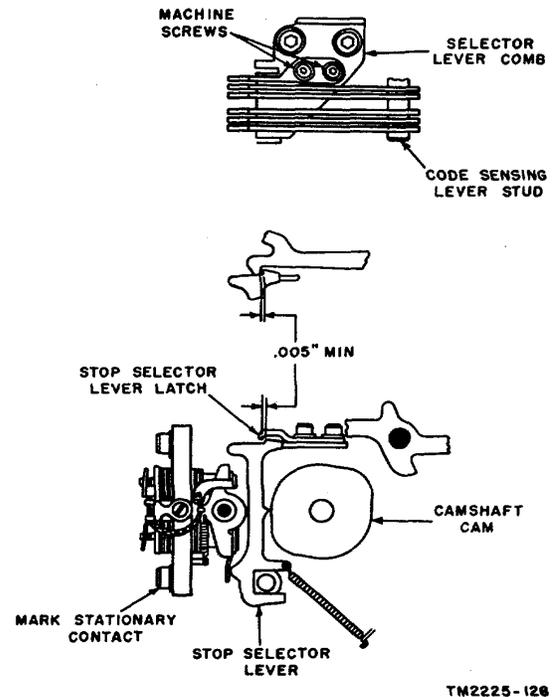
Transmitter-distributor stop pulse and contacts adjustment.
